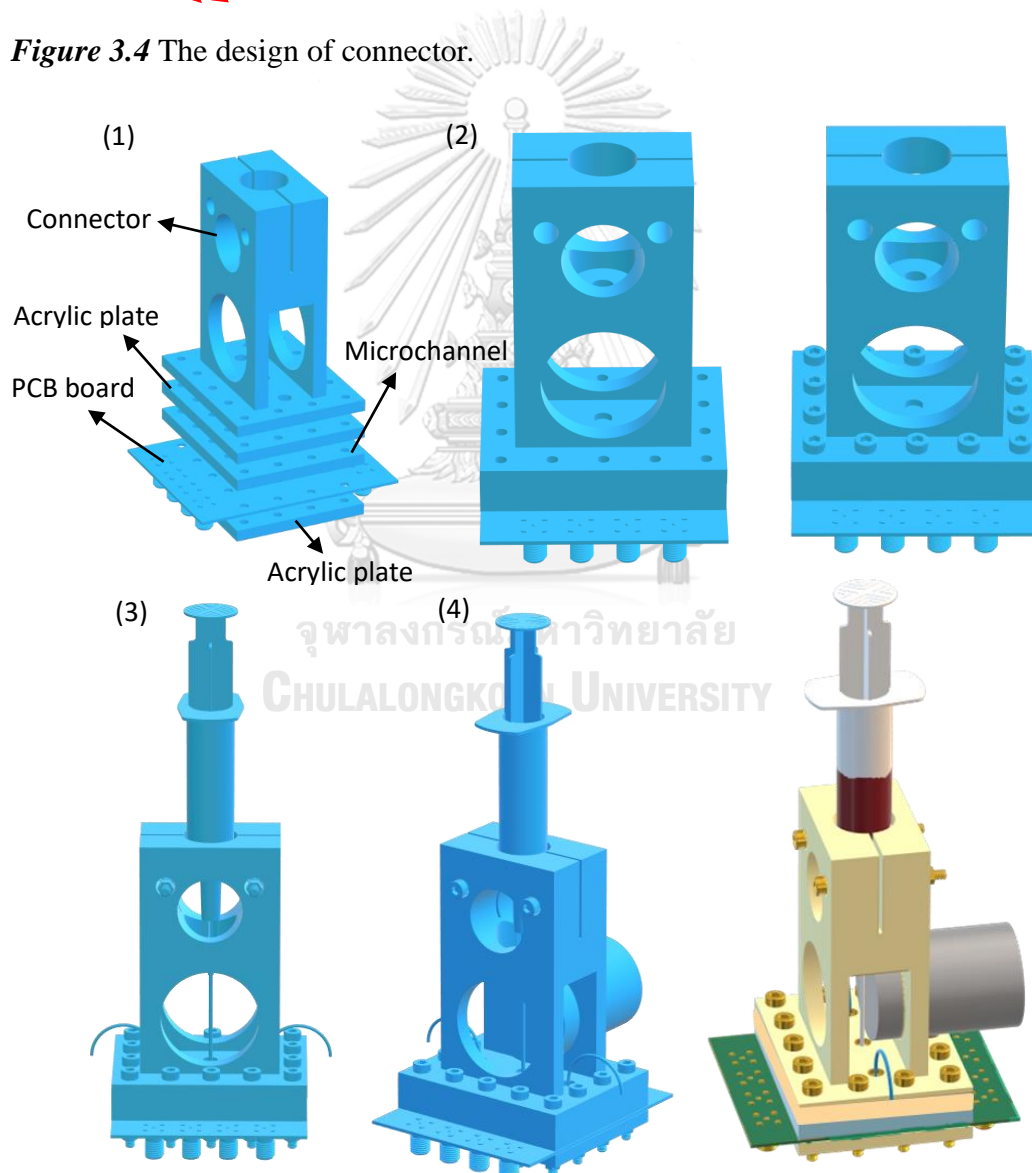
How to gather all components: (1) The components of system, (2) Arrange all components and fix position with screw, (3) Put syringe and outlet tube, and (4) Put electromagnet.
